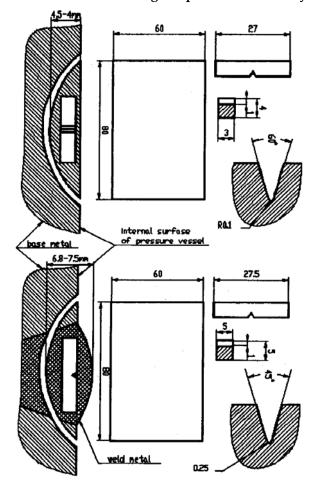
Scheme of samples cutting to fabricate sub-size impact specimens (5×5 and 3×4 mm²), [48]
